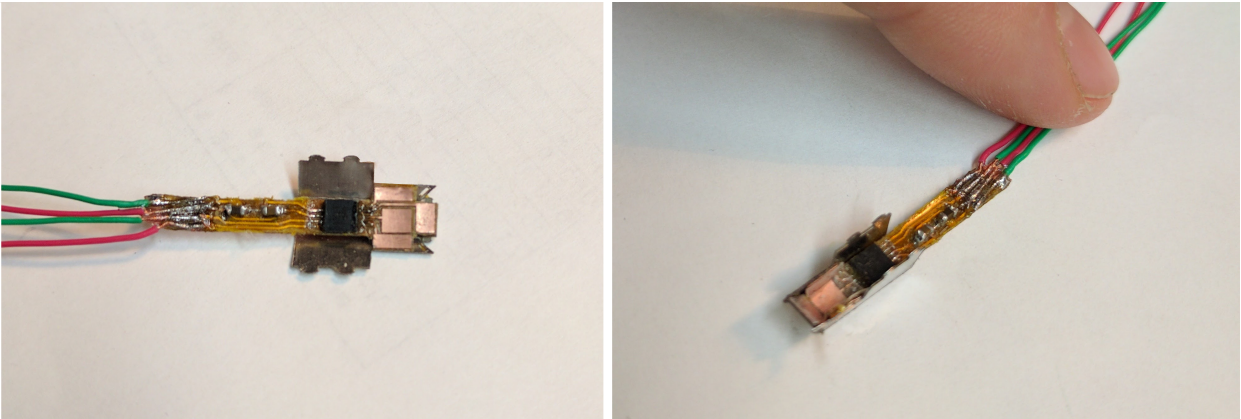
FPCB assembled with the grasper. (left) The FPCB added on top of the bottom jaw in the unfolded position. (right) The bottom jaw folded, with the FPCB installed. The flexible dielectric sheet covering the electrodes is in place in the right image. The aluminum plug that serves as the common electrode is then dropped into the jaw and attached with adhesive.
